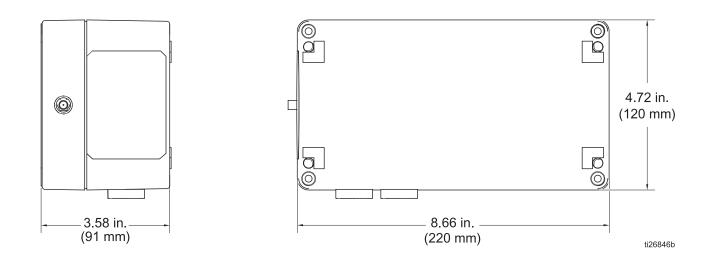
Harrier+ Dimensions and Mounting Hole Layout
